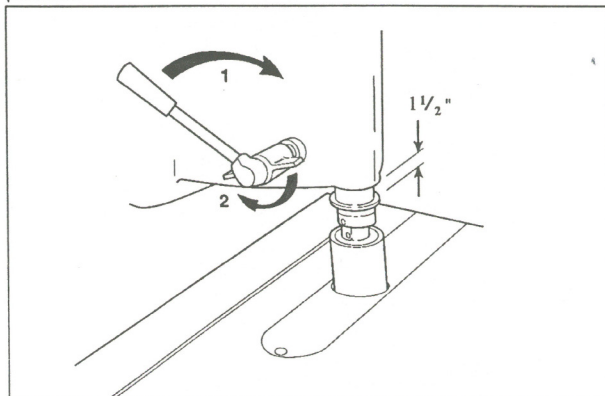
Lower quill $1\frac{1}{2}$ " and lock in place.
